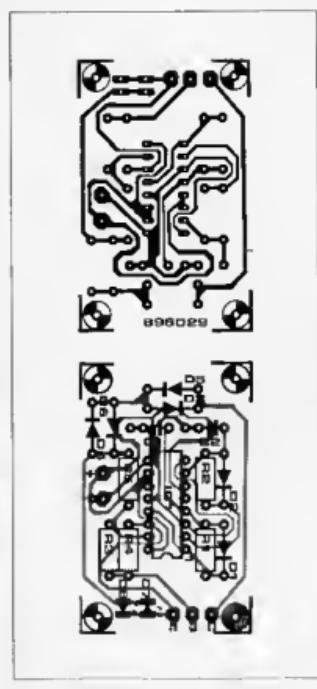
True-size track layout and component mounting plan of the printed-circuit board for the transistor tester.
